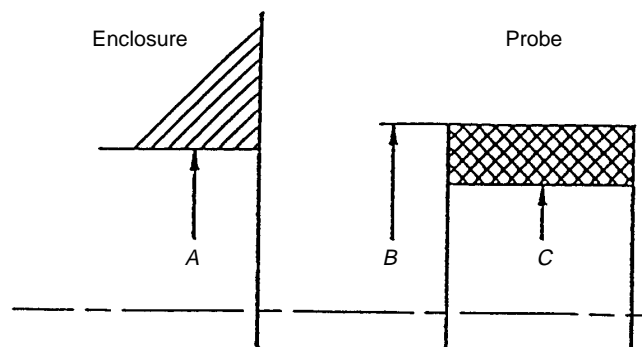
Tolerance range on the diameter of a cylindrical test probe
